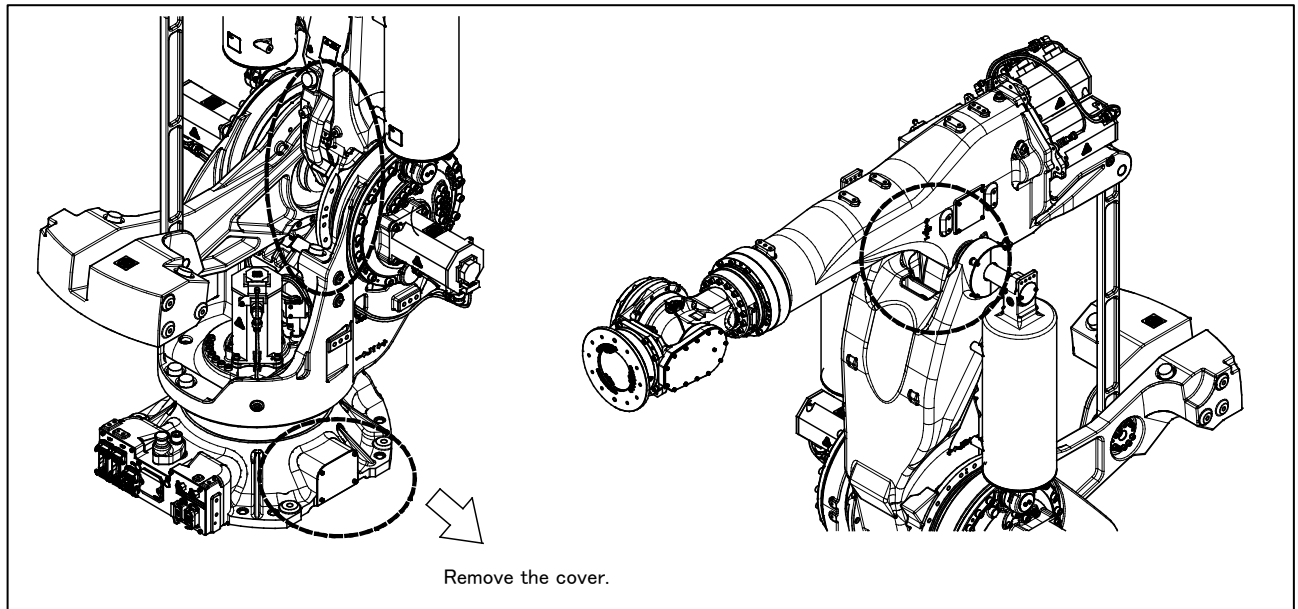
(a) Inspection points of the mechanical unit cables
